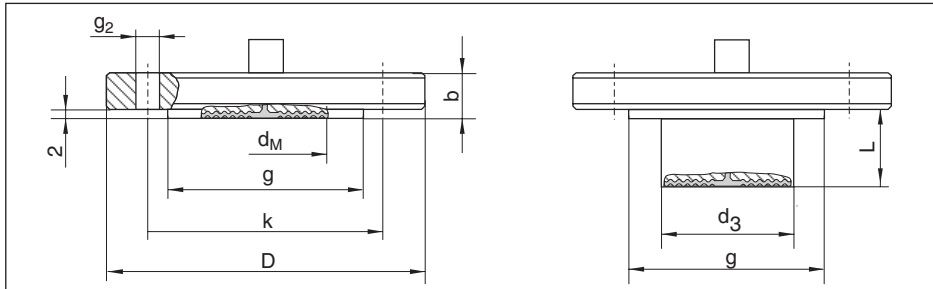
Chemical seal with EN/DIN flanges, dimensions according to EN 1092-1/DIN 2501
